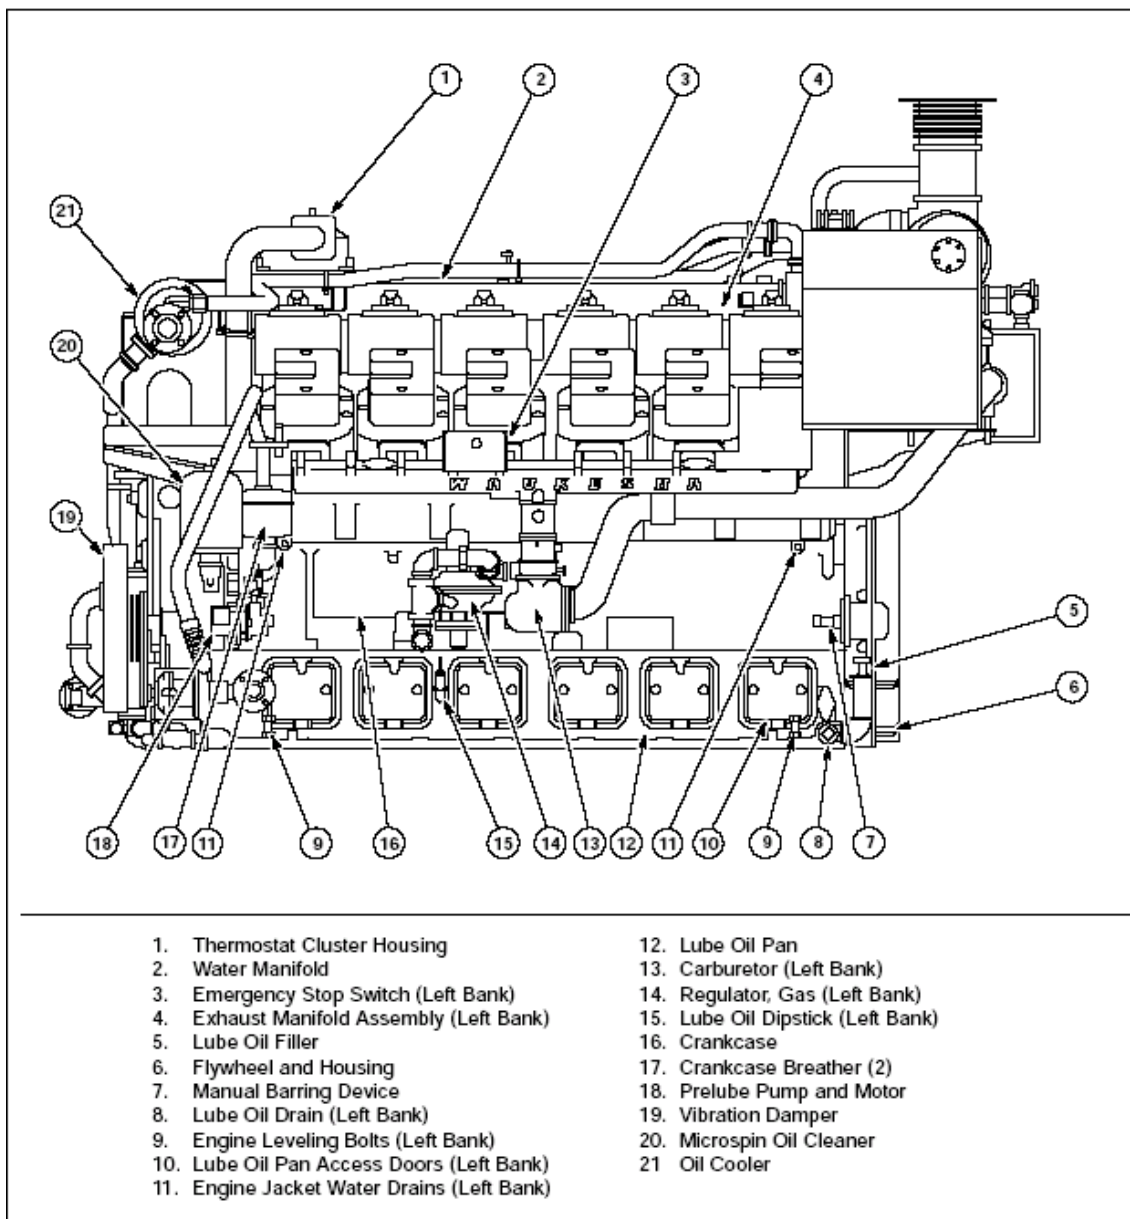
Left Side View - 12 Cylinder VHP GSI
